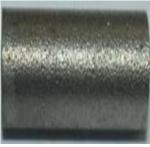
(a). Laser sintered Inconel 718 component before corrosion
